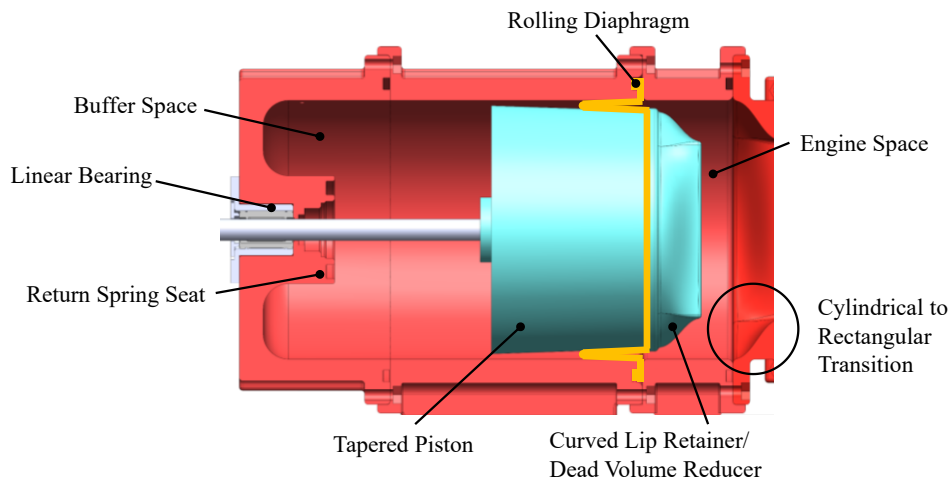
Schematic of the Rolling Diaphragm Piston Seal
